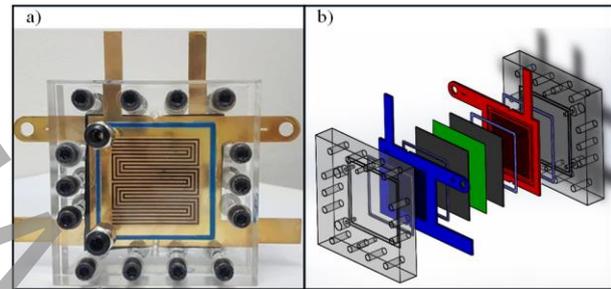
Transparent PEMFC manufactured for the present study in fuel cell laboratory of AUT (a) Front view; (b) Exploded view.
